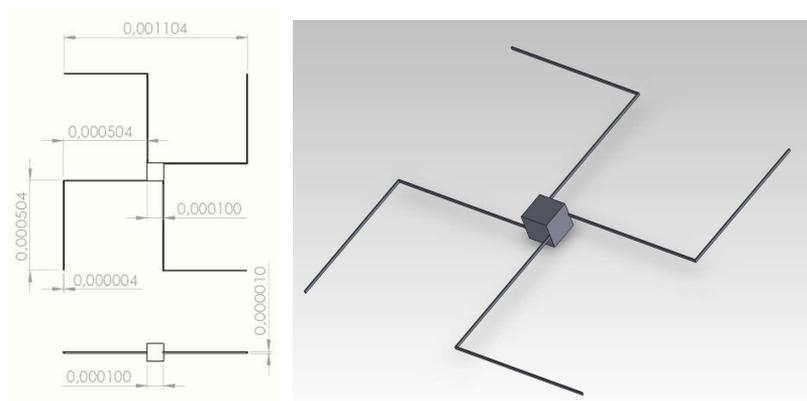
Geometry of the designed accelerometer (values given in meters) and CAD model
